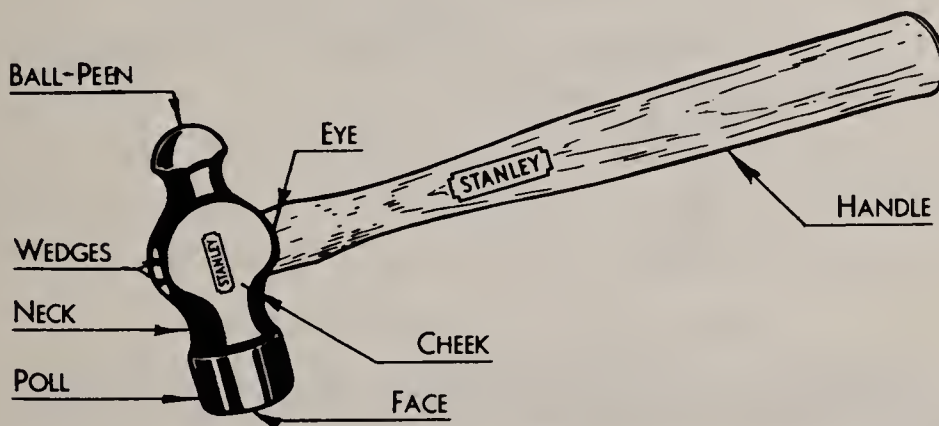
The ball-peen hammer. Ball-peen hammers are made with hardened steel faces and fitted with a handle of hickory or other hardwood.
